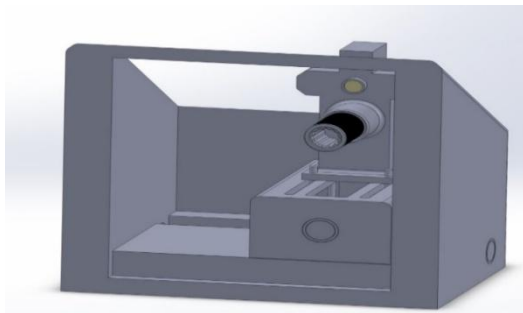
Bolt Tightening Machine Moved to the Right and Back Position
